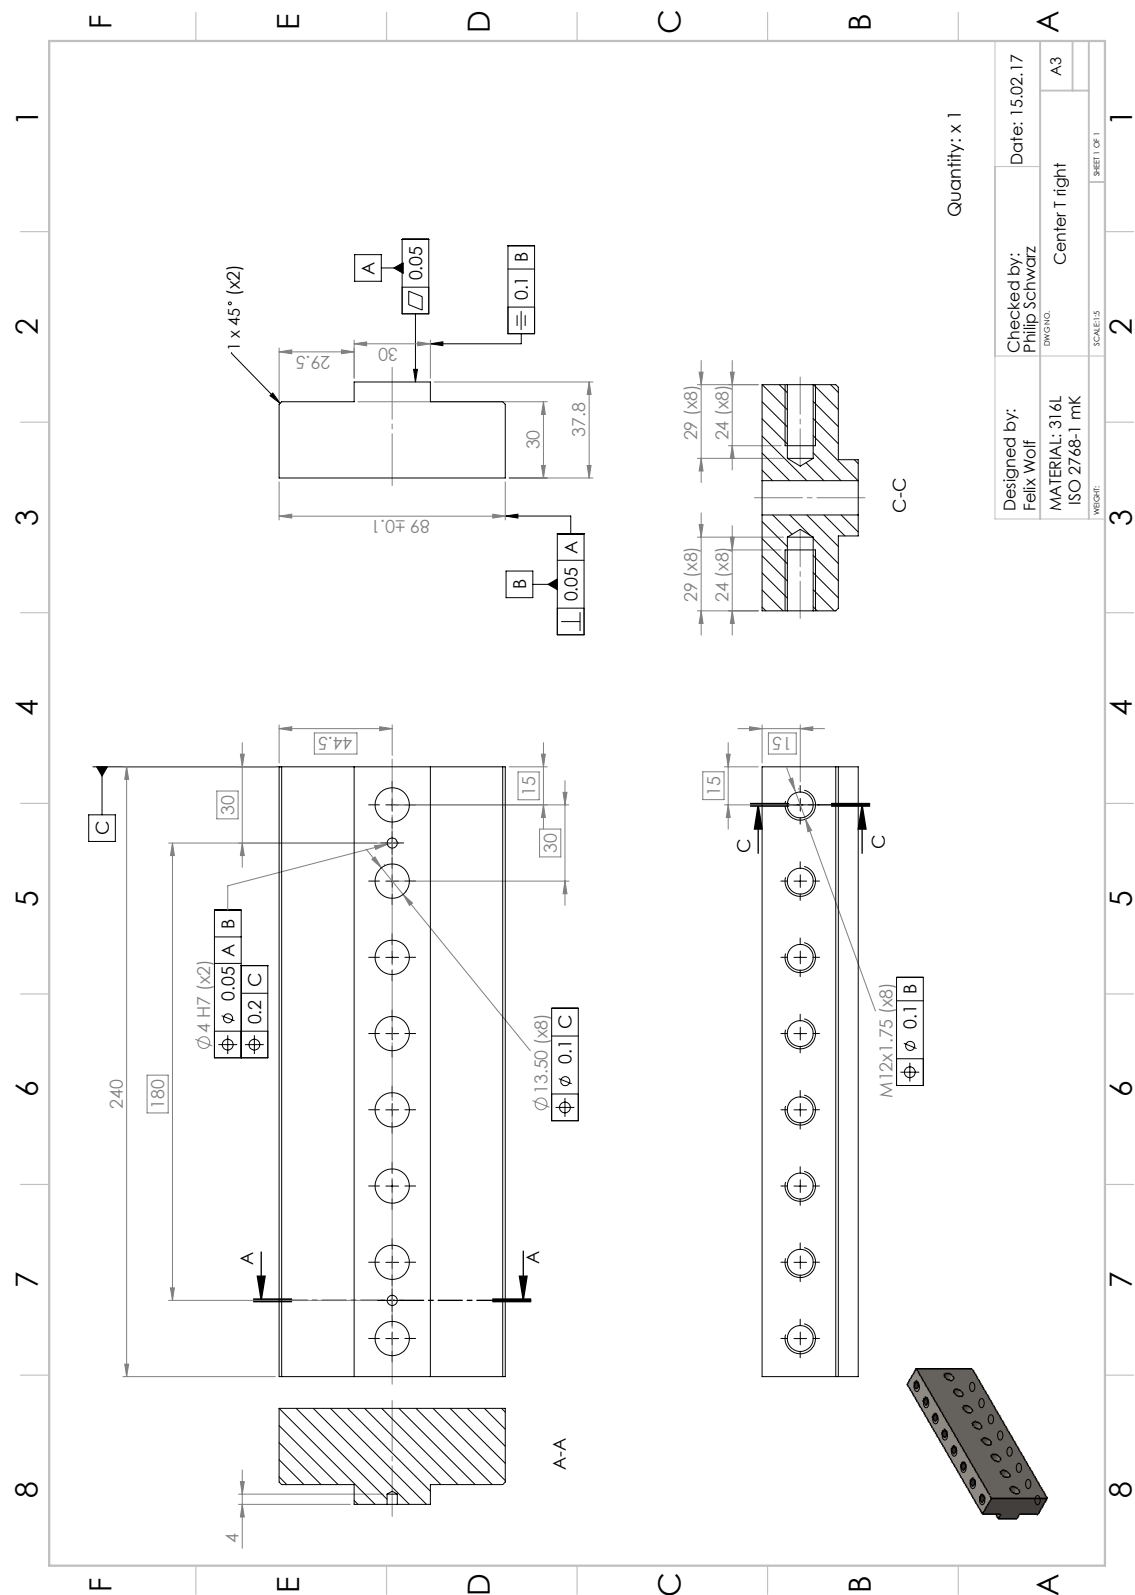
Manufacturing drawing of heat-treatment mould right centre part.
